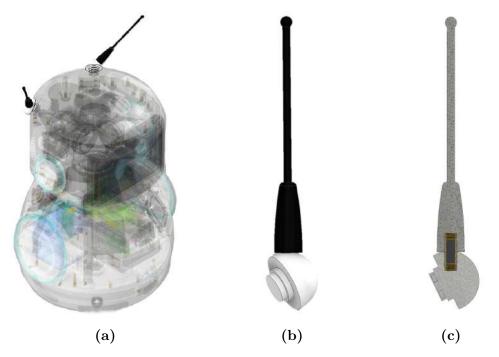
Robot antennas sub-assembly: (a) Location in the main assembly, (b) External detail view, (c) Internal detail view.
